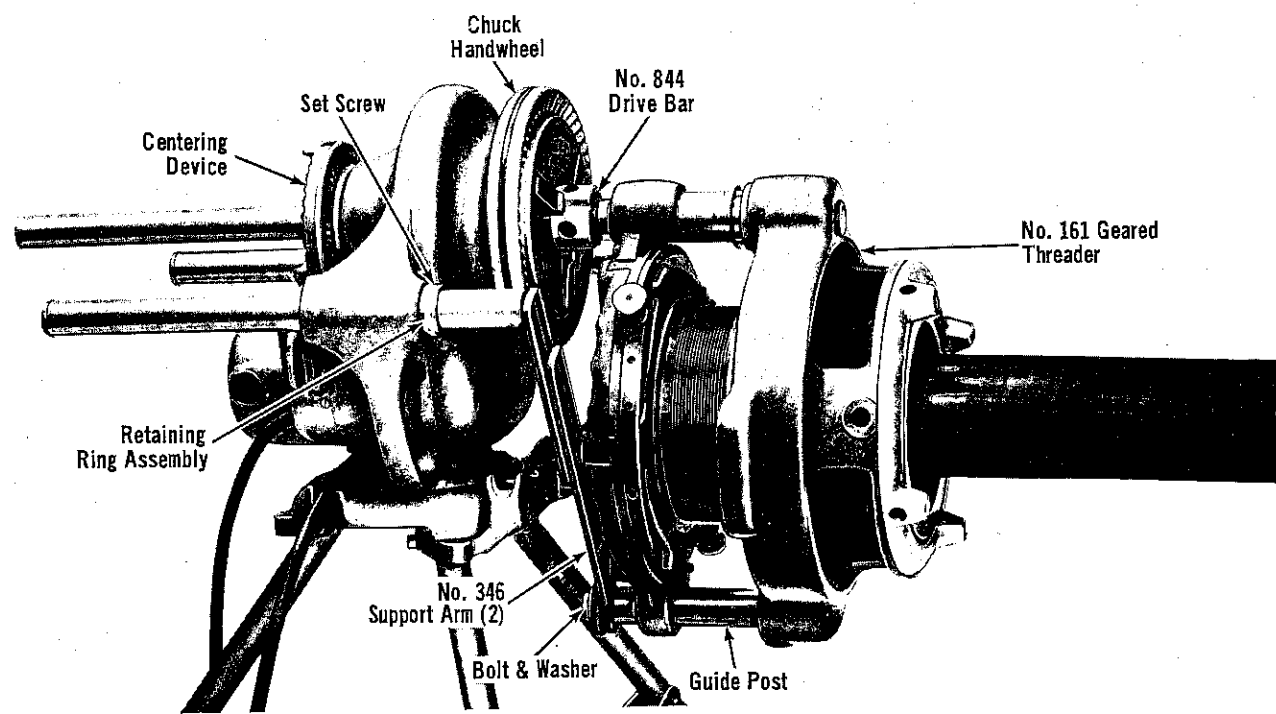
No. 161 Geared Threader Close-Coupled to Power Drive.
